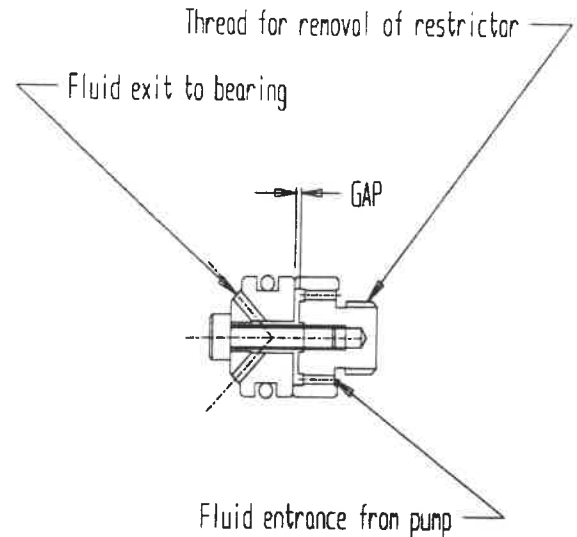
The hydrostatic restrictor is about the size of a pencil eraser and is meant to be inserted in a hole in the bearing assembly.
